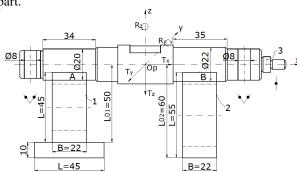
The orientation schema for straight shaft: 1 – prism with fixing unscrewed holes, 45x22 mm; 2 - prism with fixing unscrewed holes, 55x22 mm; 3 – supporting pin with plate cylindrical head, 16x10 mm.
